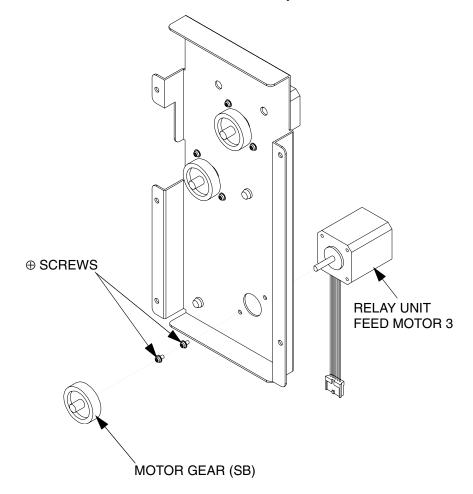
Removal of the Relay Unit Feed Motor 3
